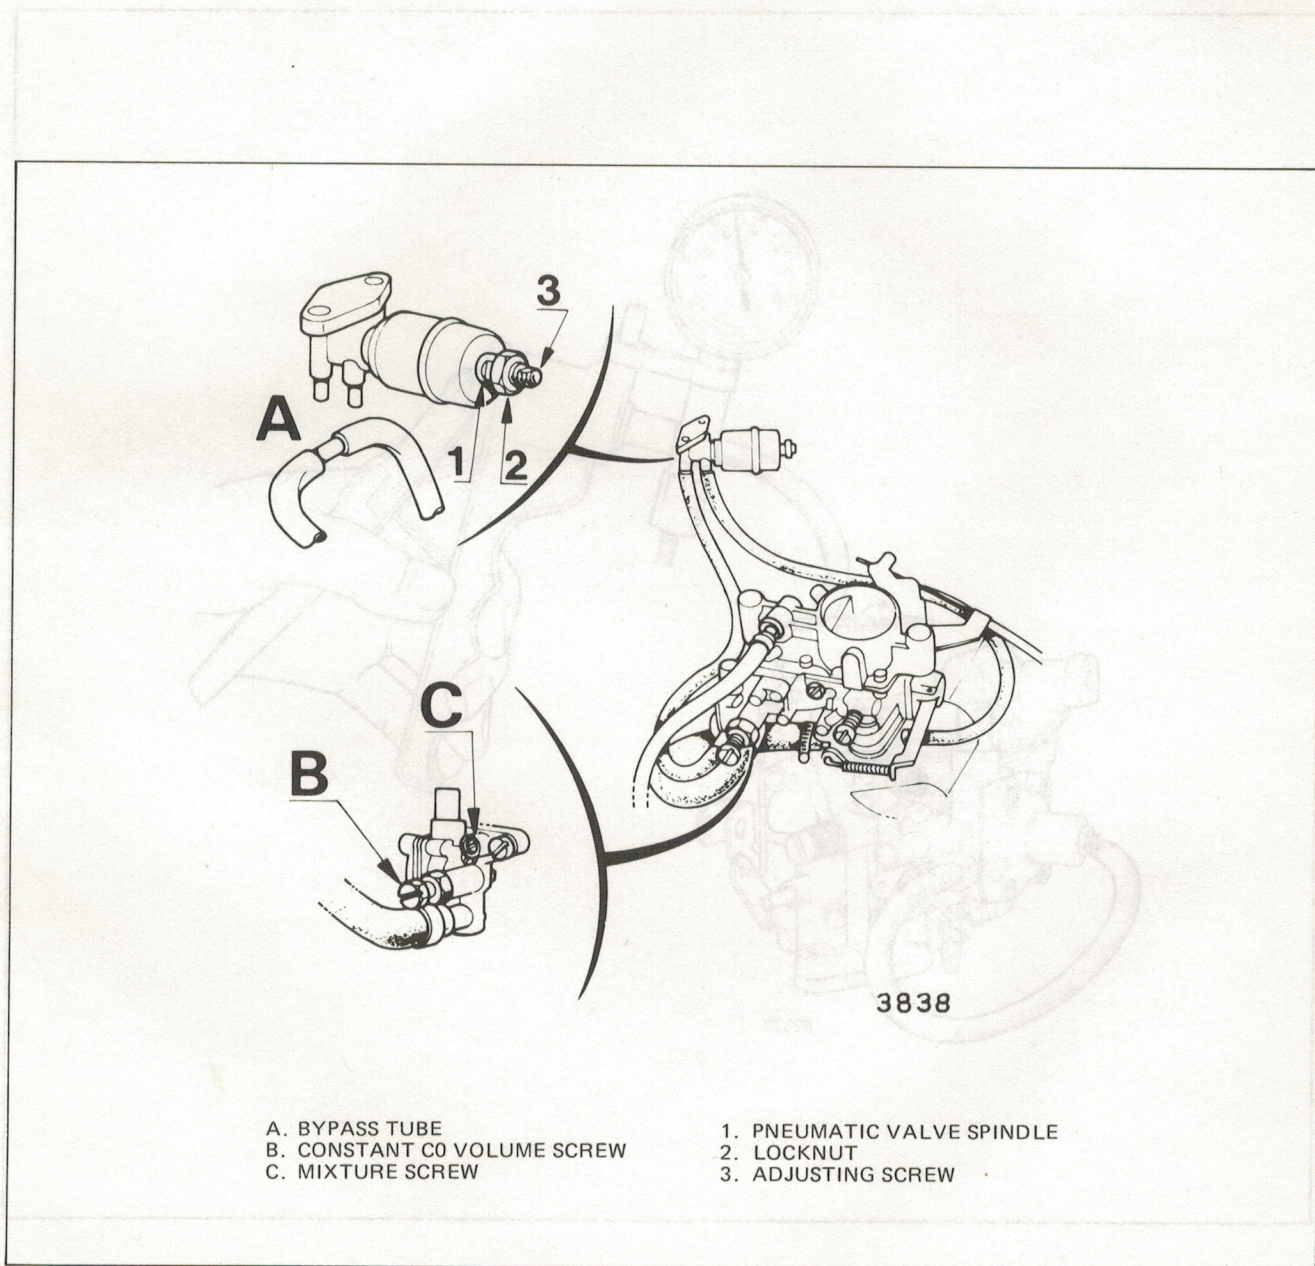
Details of the deceleration valve and pneumatic valve—Early vehicles
